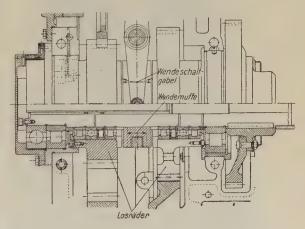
Clutch of the reverse gear of the Voith T 36 transmission. The loose gears are mounted on the shaft of the reverse gear. When the reverse gear is operated, one loose gear is in each position coupled to the shaft of the reverse gear by means of its sleeve; it then has the same speed of rotation as this shaft. On the other hand, the relative speed of the loose gear and the shaft is zero, so that the roller bearings no longer turn; hence the risk of the formation of indentations on the races.
